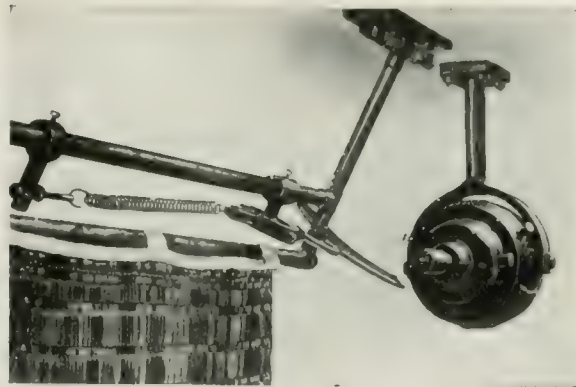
Ship type Punkah Fan, Quadrant about to engage with Pinion on under side.
